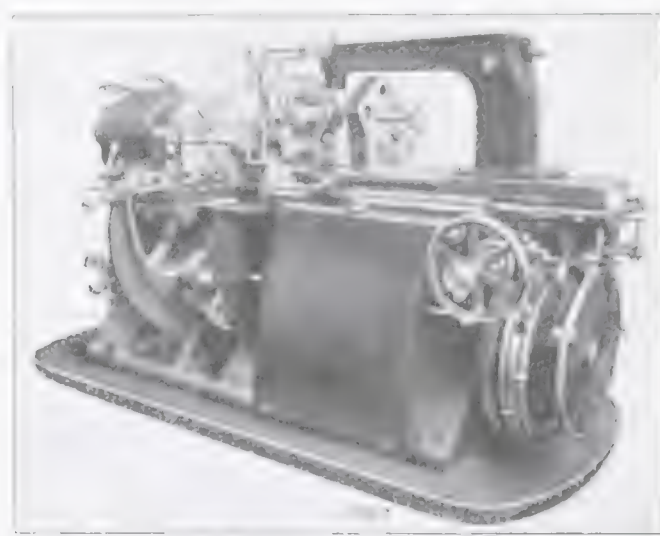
SHOWING ROUGHING AND FINISHING TOOLS
